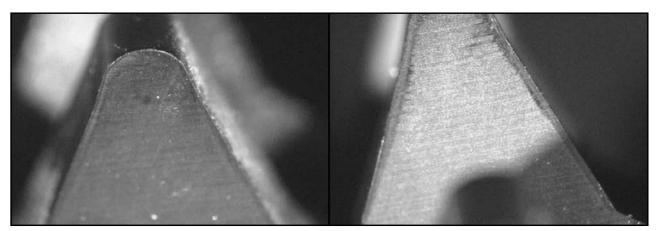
Hob tooth after 300 gears (magnification 30x) Ovako 158Q (left); reference material (right).
